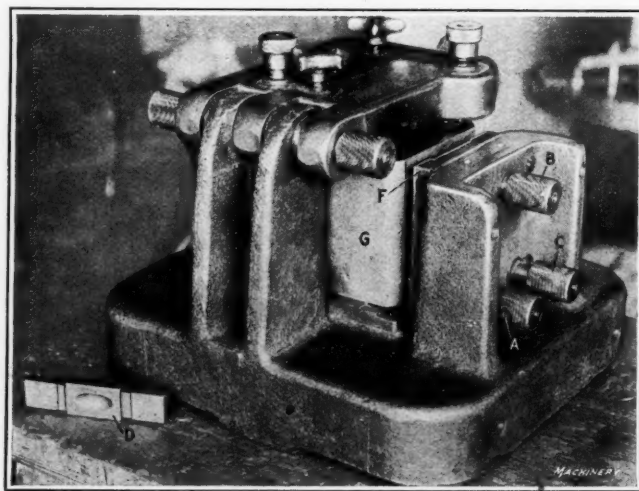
Box Type of Gage for inspecting Tapped Holes and Milled Surfaces on Electric Starter Generator Frame
